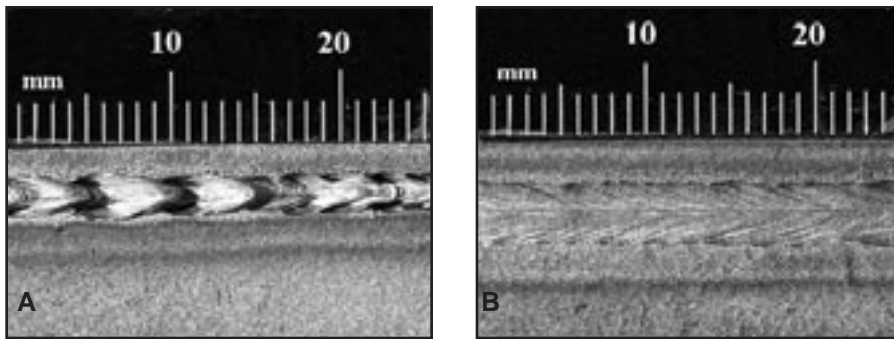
Complete-penetration butt-joint welds of steel (1045 steel, 6.35 mm, complete joint penetration, CO₂ laser, 6 kW, welding speed of 1.25 m/min). A — Irregular butt-joint weld produced by a conventional single-beam laser; B — smooth butt-joint weld made by a dual-beam laser.
